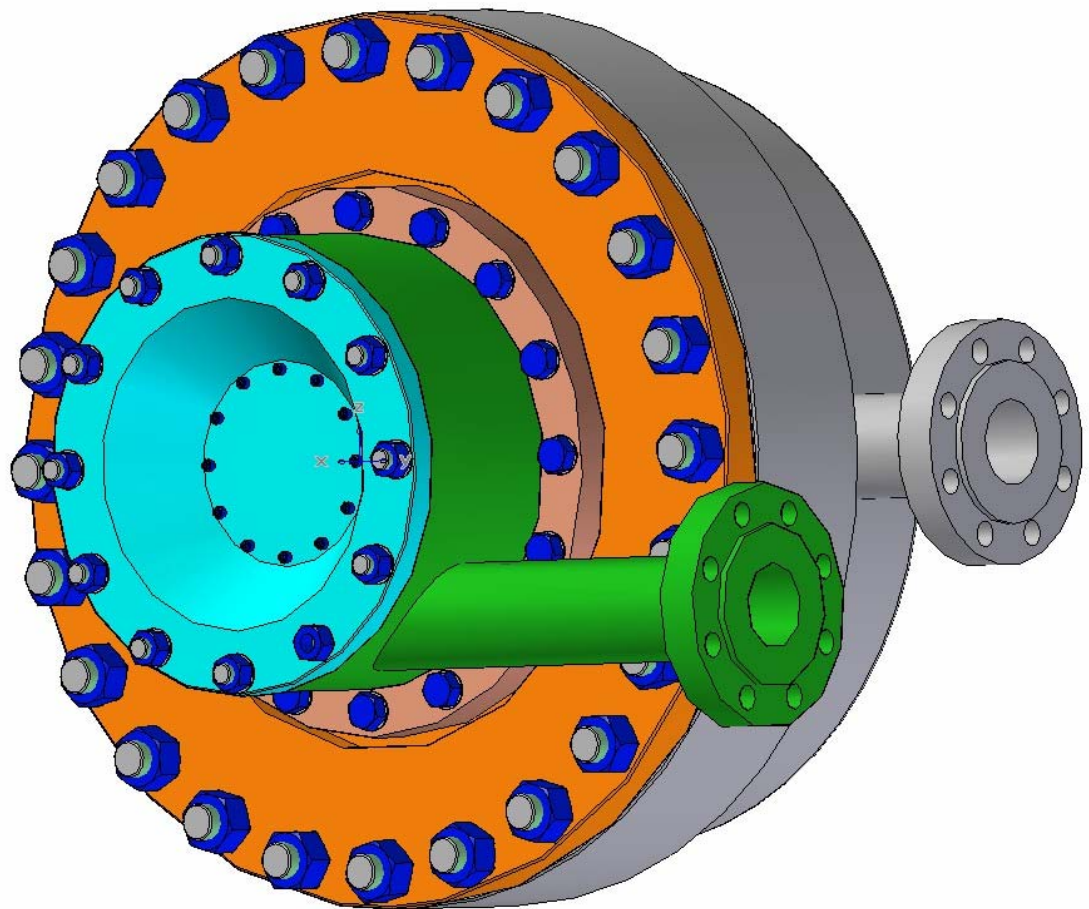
Solid Model Showing Completed Integral Separator Assembly
